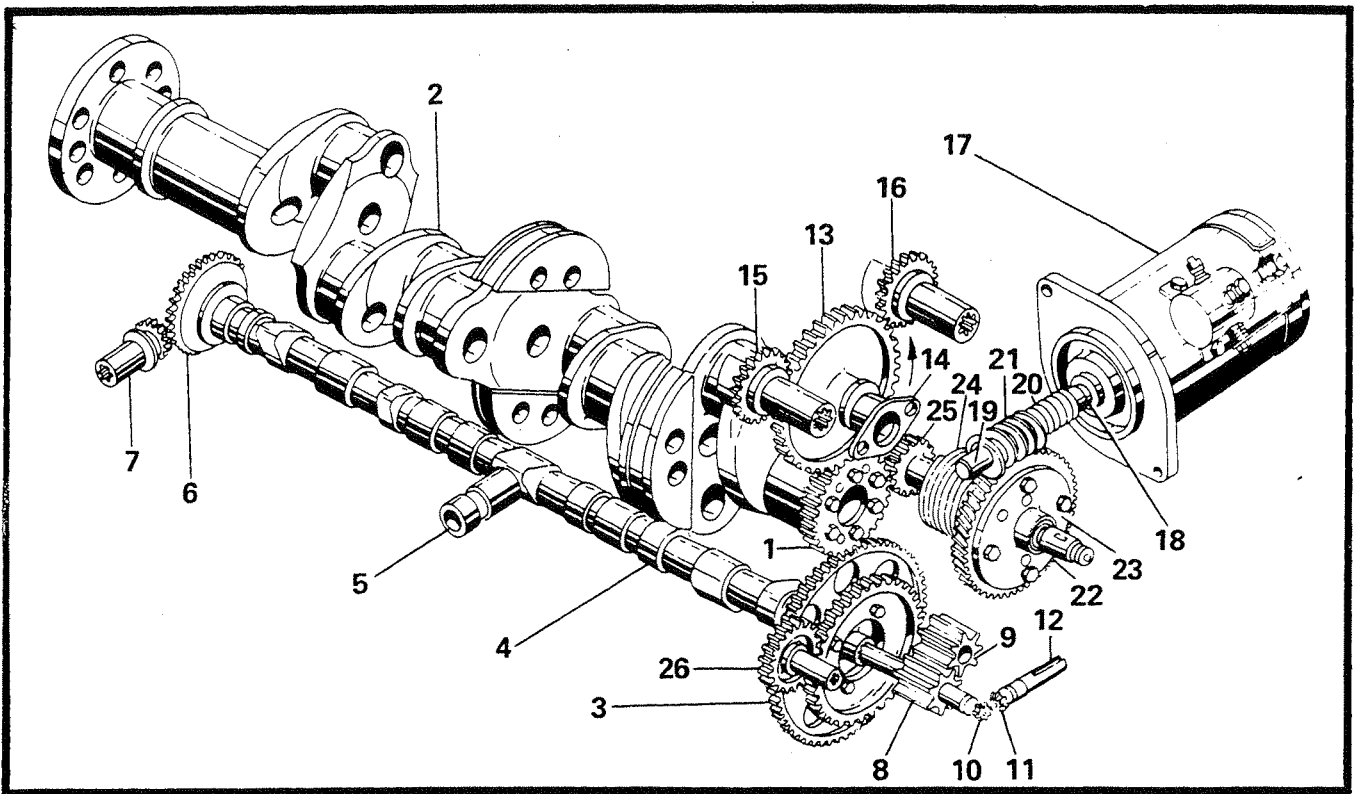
GEAR TRAIN DIAGRAM
